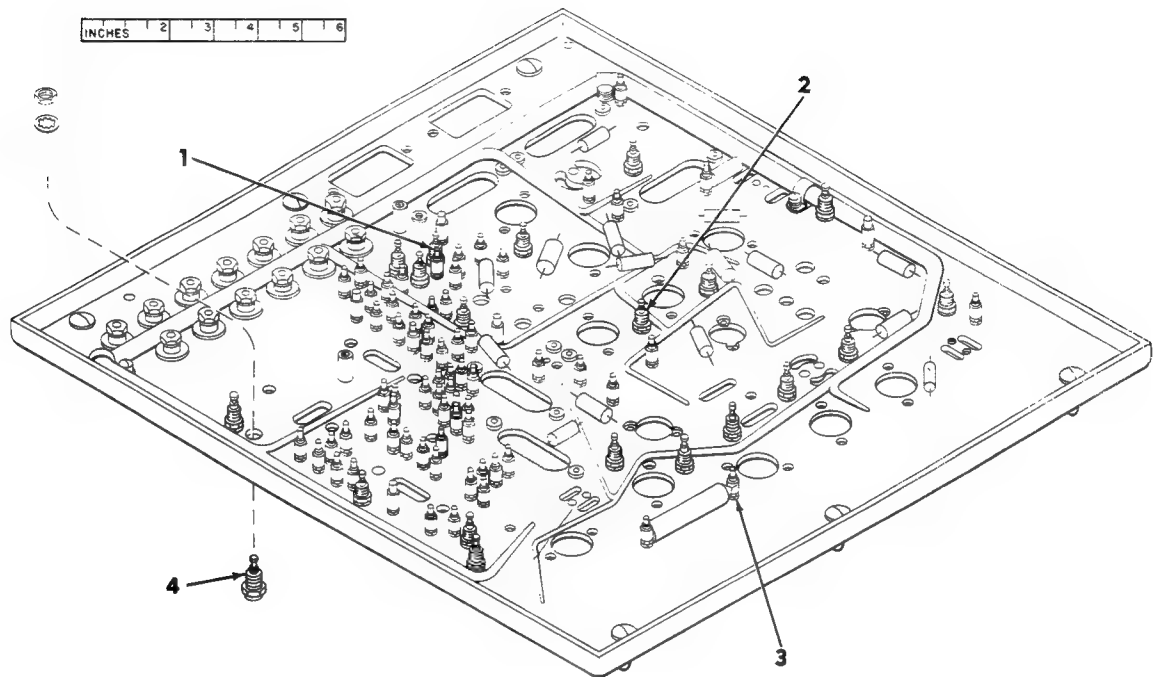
Synchronizer, electrical (9983937)—partial exploded view
